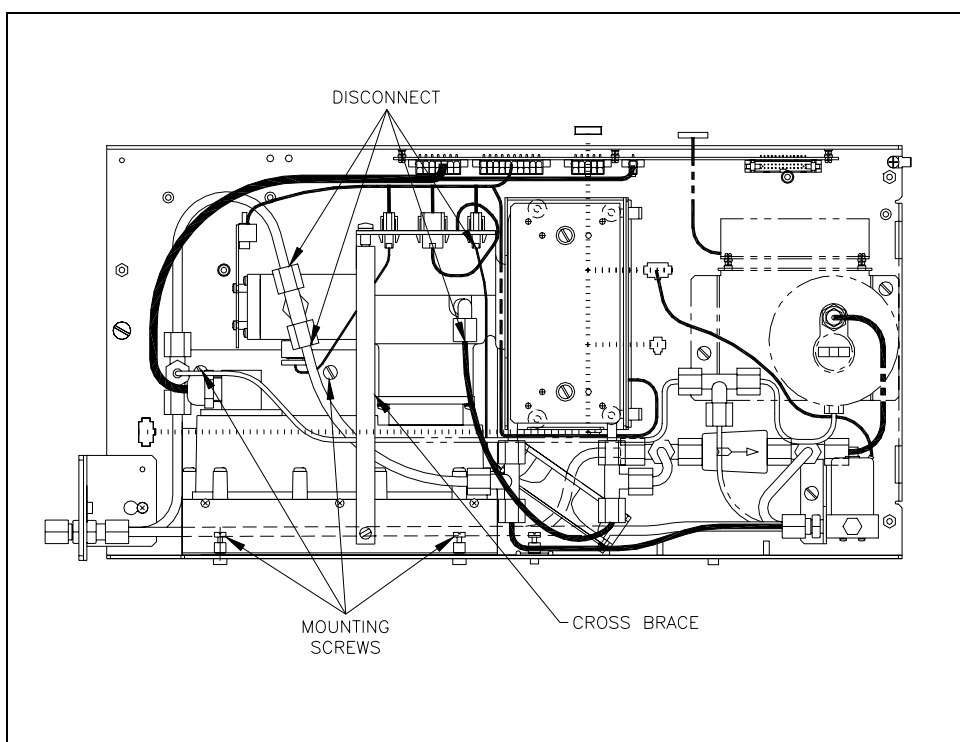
Rx Cell/PMT Housing Removal (SERIES B)
